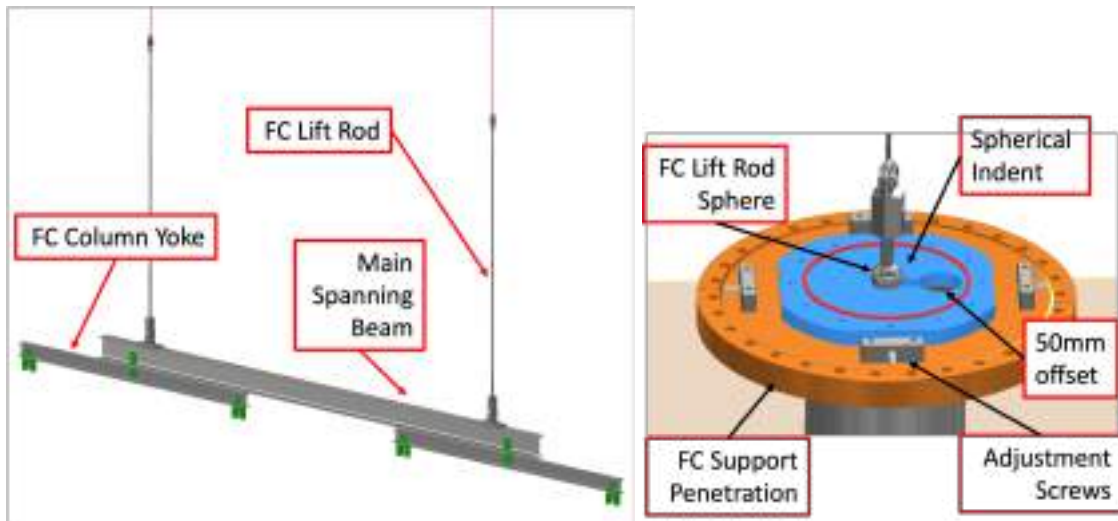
Left: field cage support beam showing the major sub-assemblies. Right: field cage roof penetration showing the x - y position adjustment system, the penetration for lifting the support beam assembly, and the spherical socket for final positioning.
